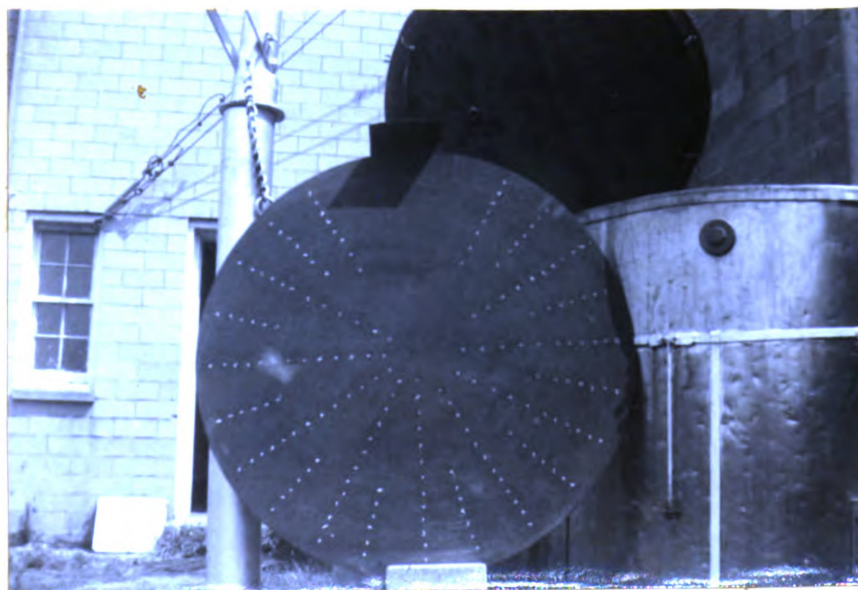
The steel plate which fits into the bottom of the tub. Holes are to disperse steam.
